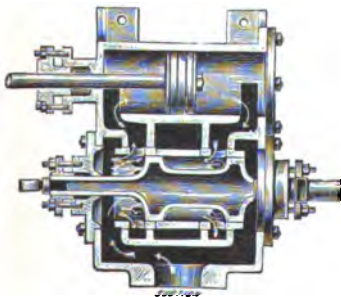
Piston Valve arrangement of Evans' 'Reliable' Pump.
